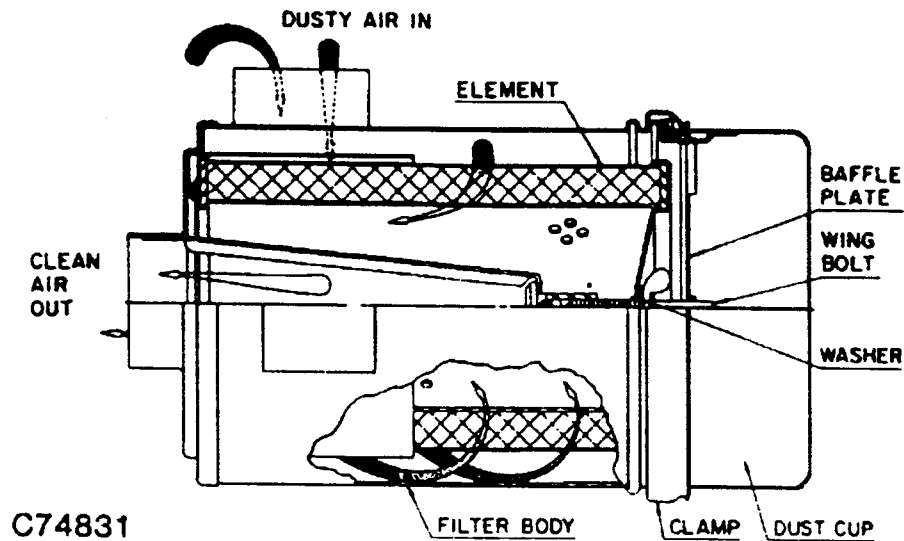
HEAVY DUTY AIR FILTER (STANDARD)
